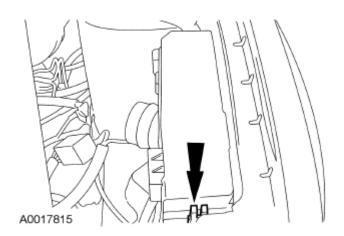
Locating PDB Cable Nut Courtesy of FORD MOTOR CO.
